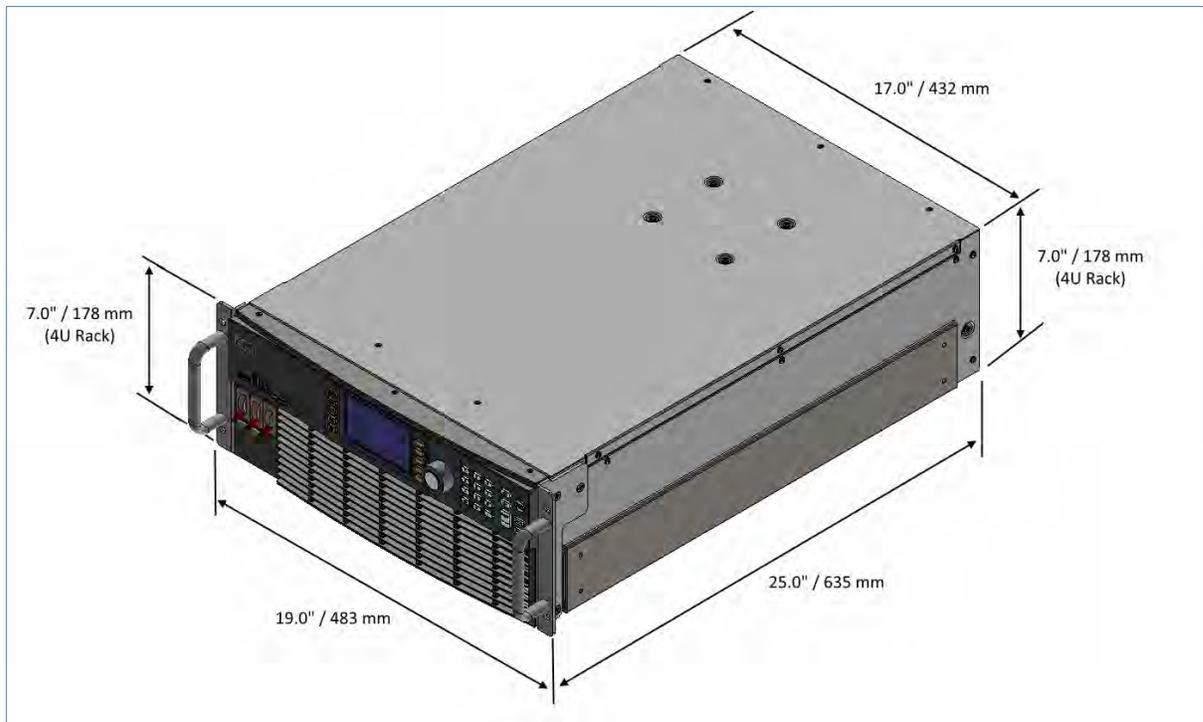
Dimension Drawing ADF Series® 15KW Model
